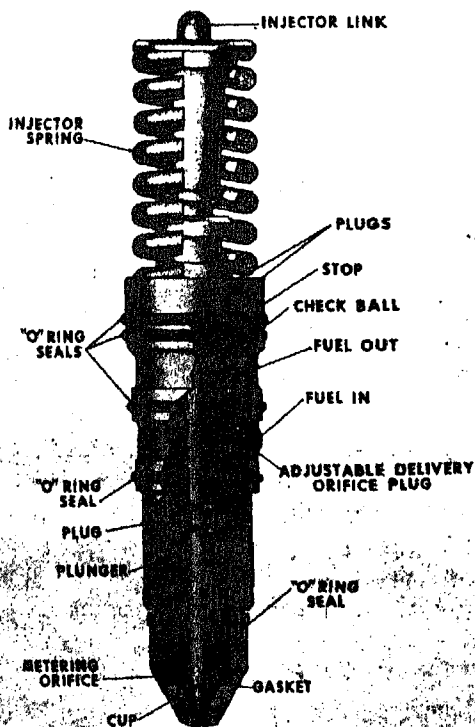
Cylindrical PT (type B) injector cross-section
